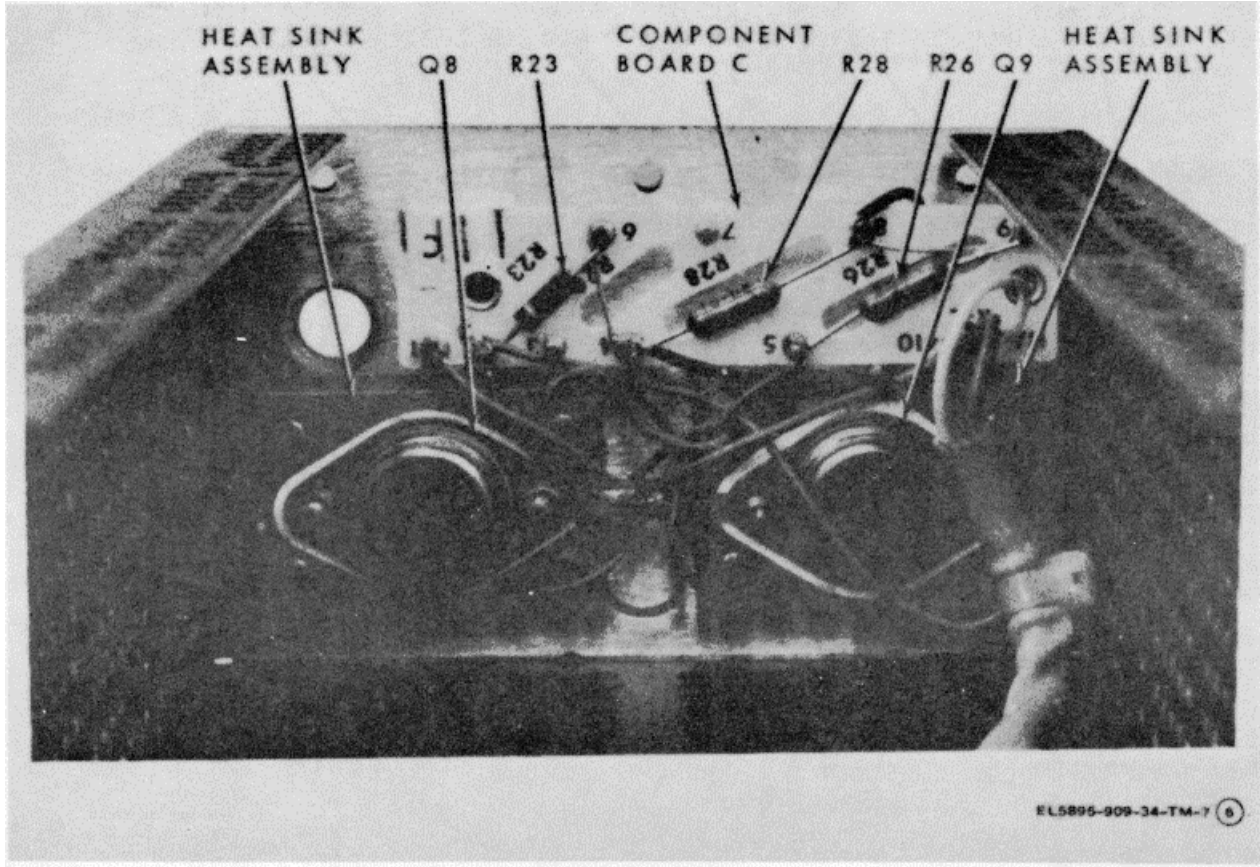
15 V dc power supply HTA-3A6PS2, parts location (sheet 6 of 6)
